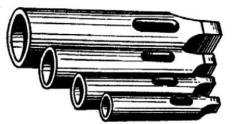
Drill socket for mounting drill chuck and taper shank drills in spindle
